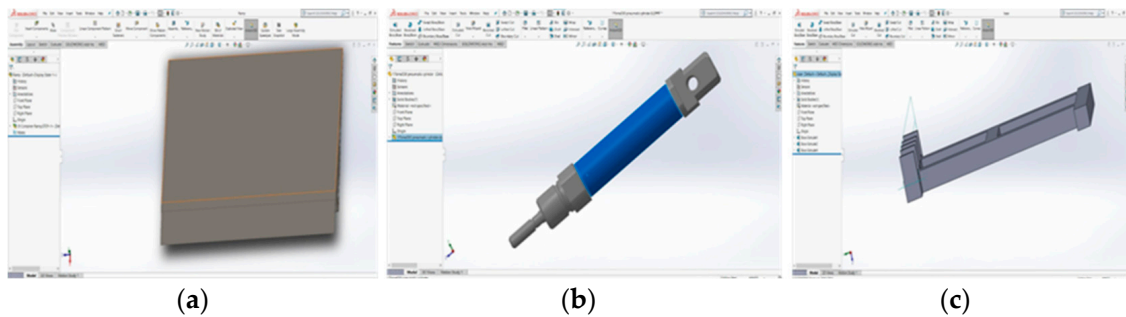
(a) Top view of ramp with lip. (b) Design of pneumatic cylinder. (c) Side view of base.
